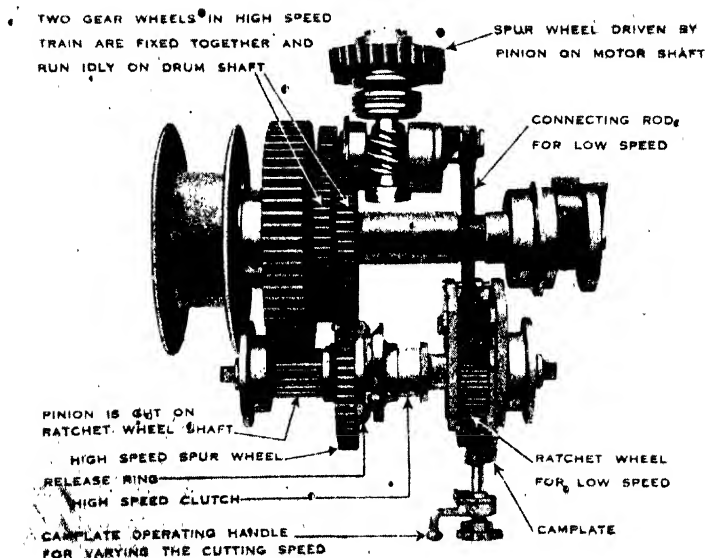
MOVING PARTS OF THE HAULAGE GEAR
